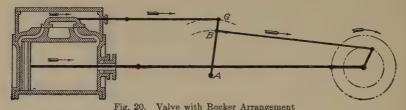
shows a valve that is not in line with the eccentric. An instance where this occurs is in horizontal engines when the valve is set on top of the cylinder instead of on one side. By means of the rocker A G, the valve may receive its proper motion.
